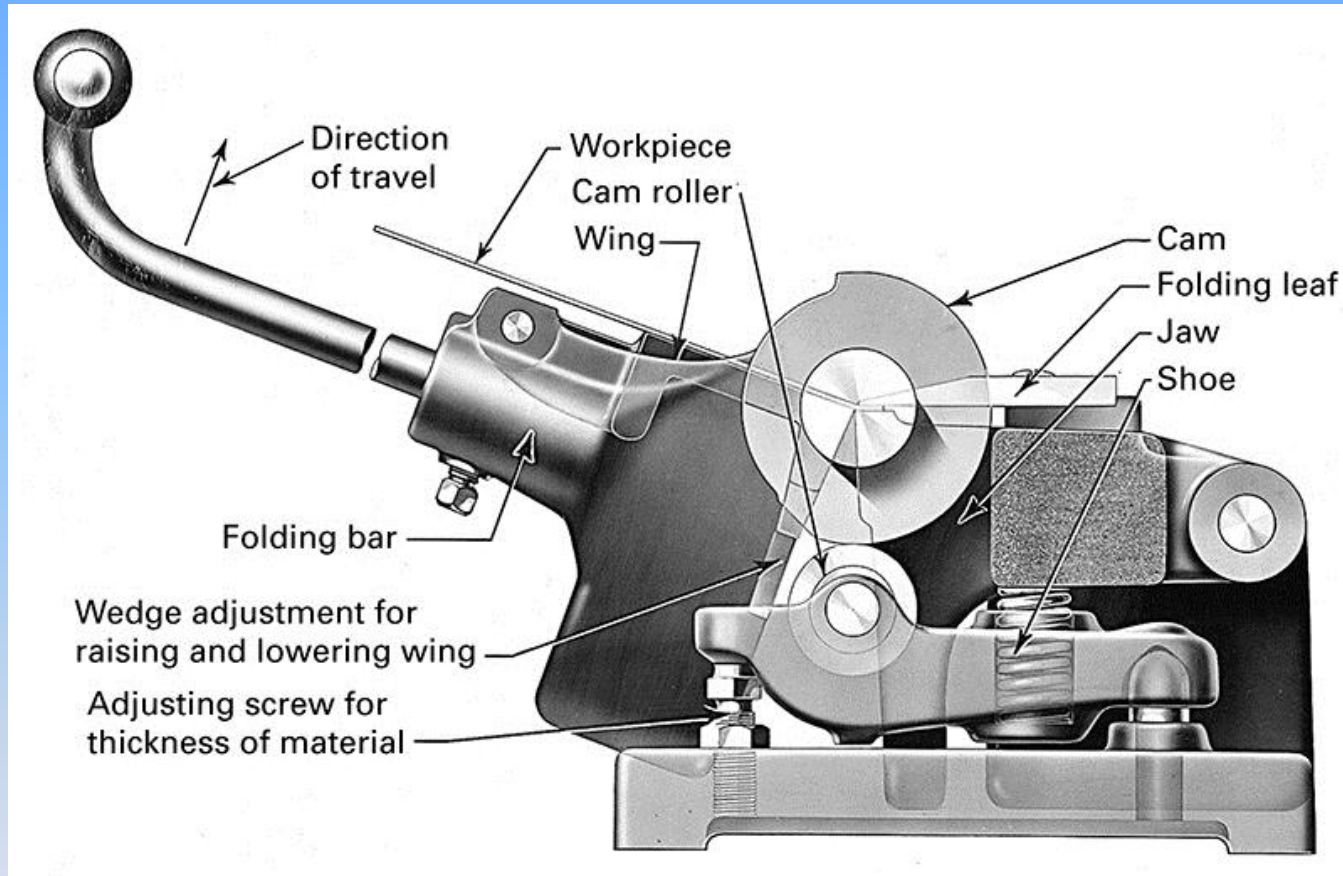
Phantom section of a bar folder, showing position and operation of internal components. (Courtesy of Niagara Machine and Tool Works, Buffalo, N.Y.)
